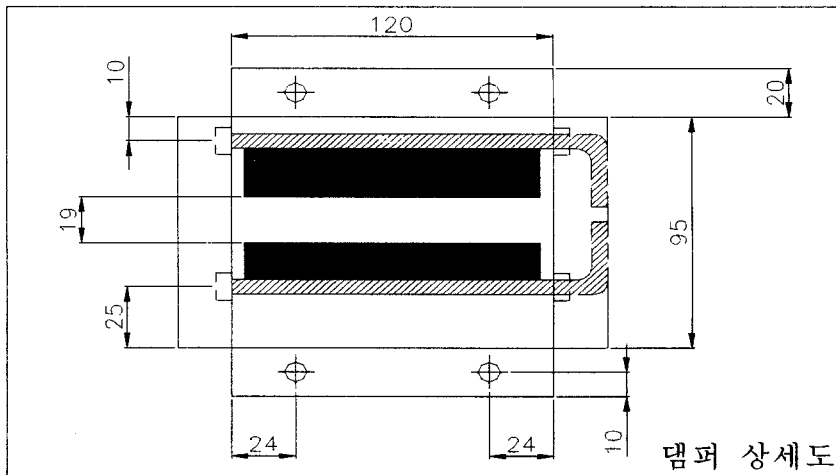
Detail drawing of damper in the blower of developed garlic separator.
